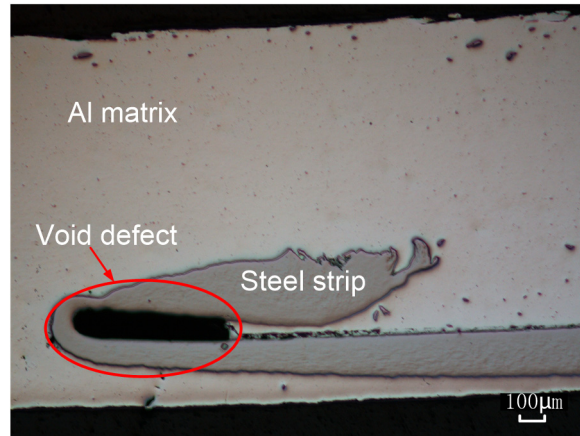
Void defect in retreating side (1800rpm, 120mm/min and tool offset of 1.63mm)
